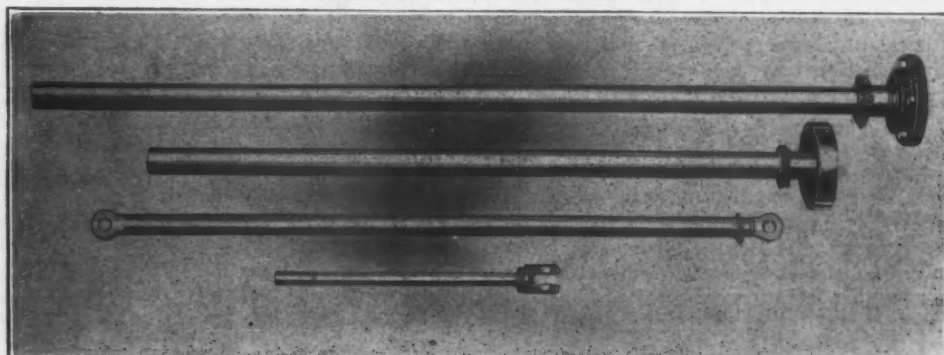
Examples of Forged Ends Welded to Solid or Tubular Shafts.
